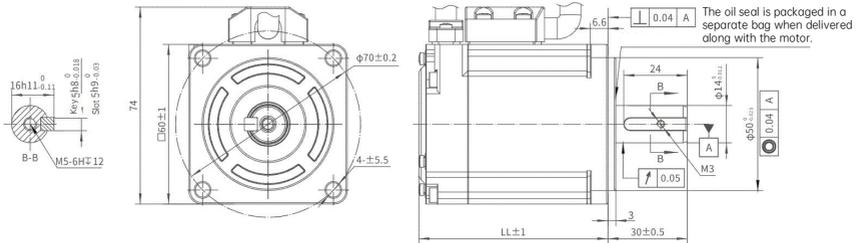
Frame No. 60 servo motor dimensions (without brake)
